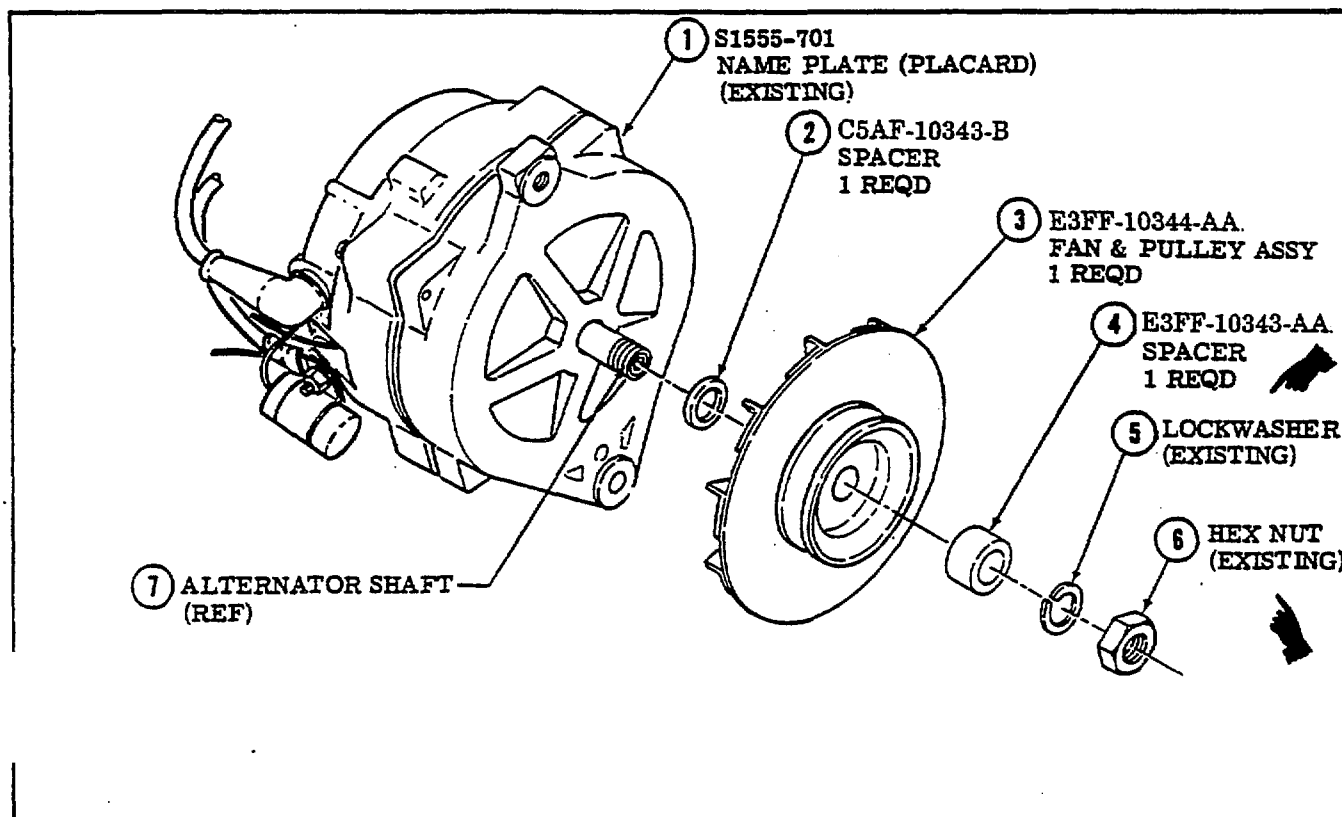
A-2. Alternator Fan and Pulley Assembly Installation
